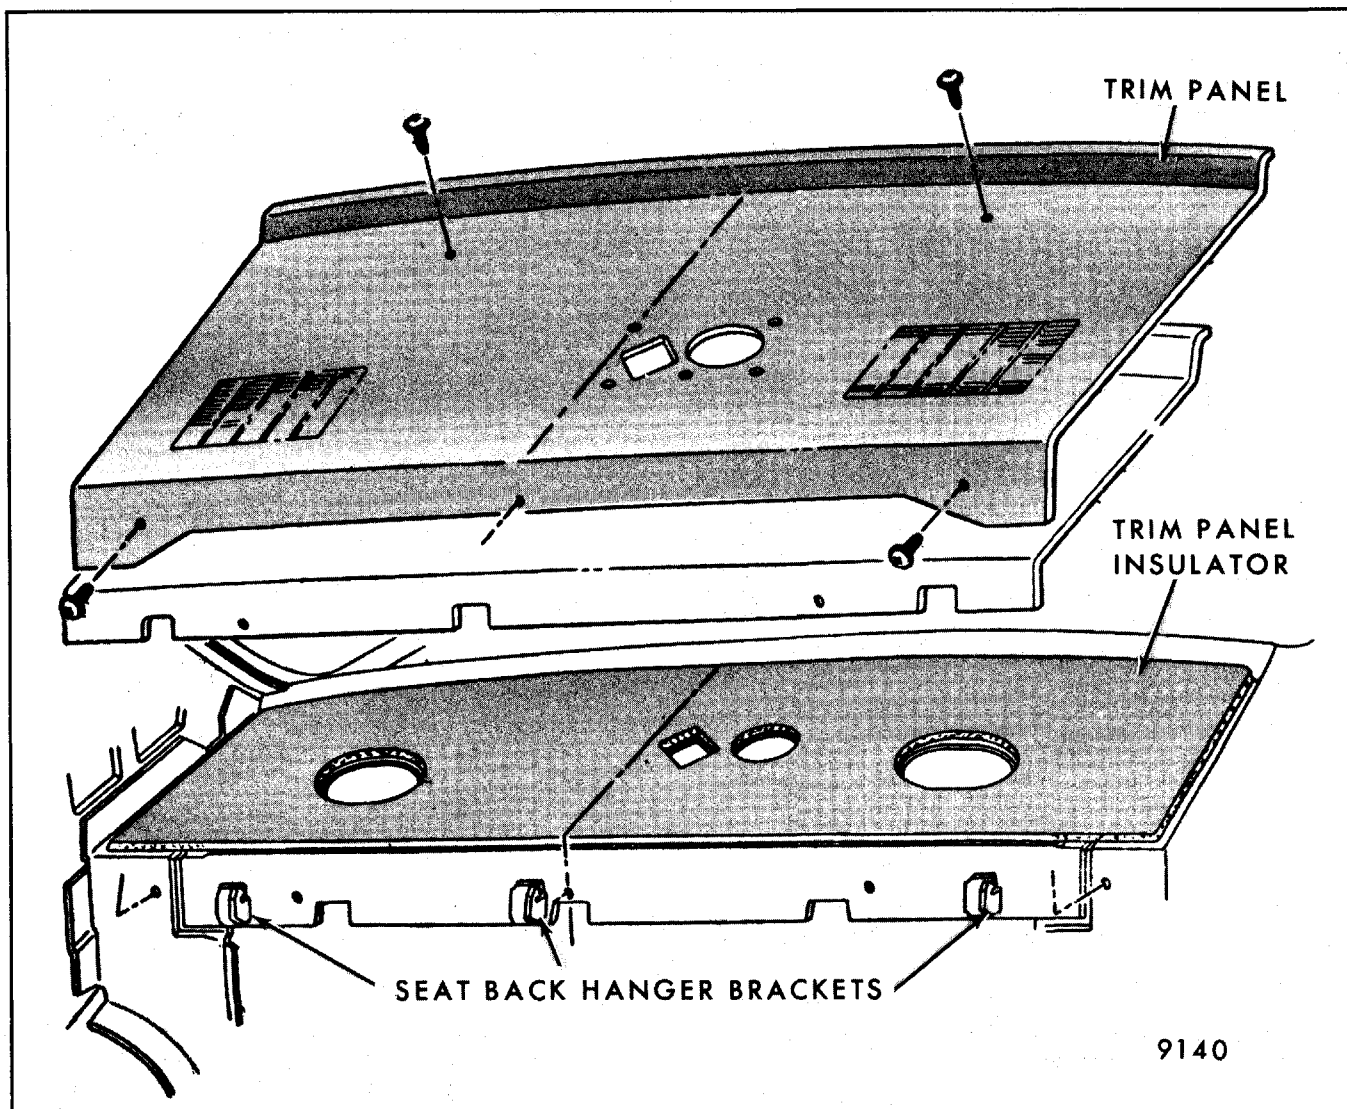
Back Window Trim Panel and Insulator Attachment - Typical "H-27,X-27,69" Styles
